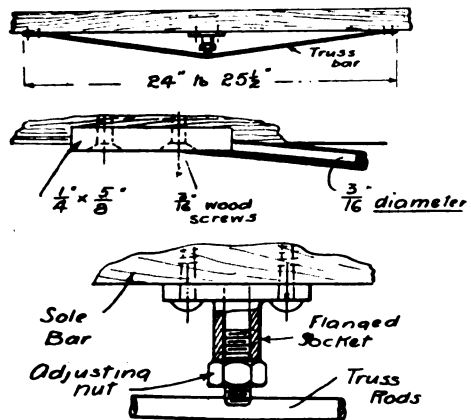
UNDER-FRAME TRUSS ROD AND DETAILS. (Not to scale.)
